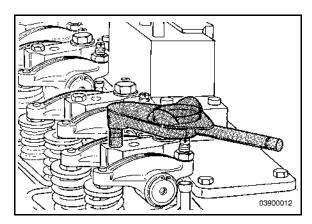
TIGHTEN THE 8 MM PEDESTAL CAPSCREWS
